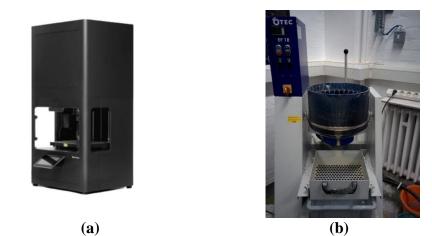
Diagrams of a Markforged Metal 3D printer (a) and a centrifugal disk finishing machine (b) [11].
